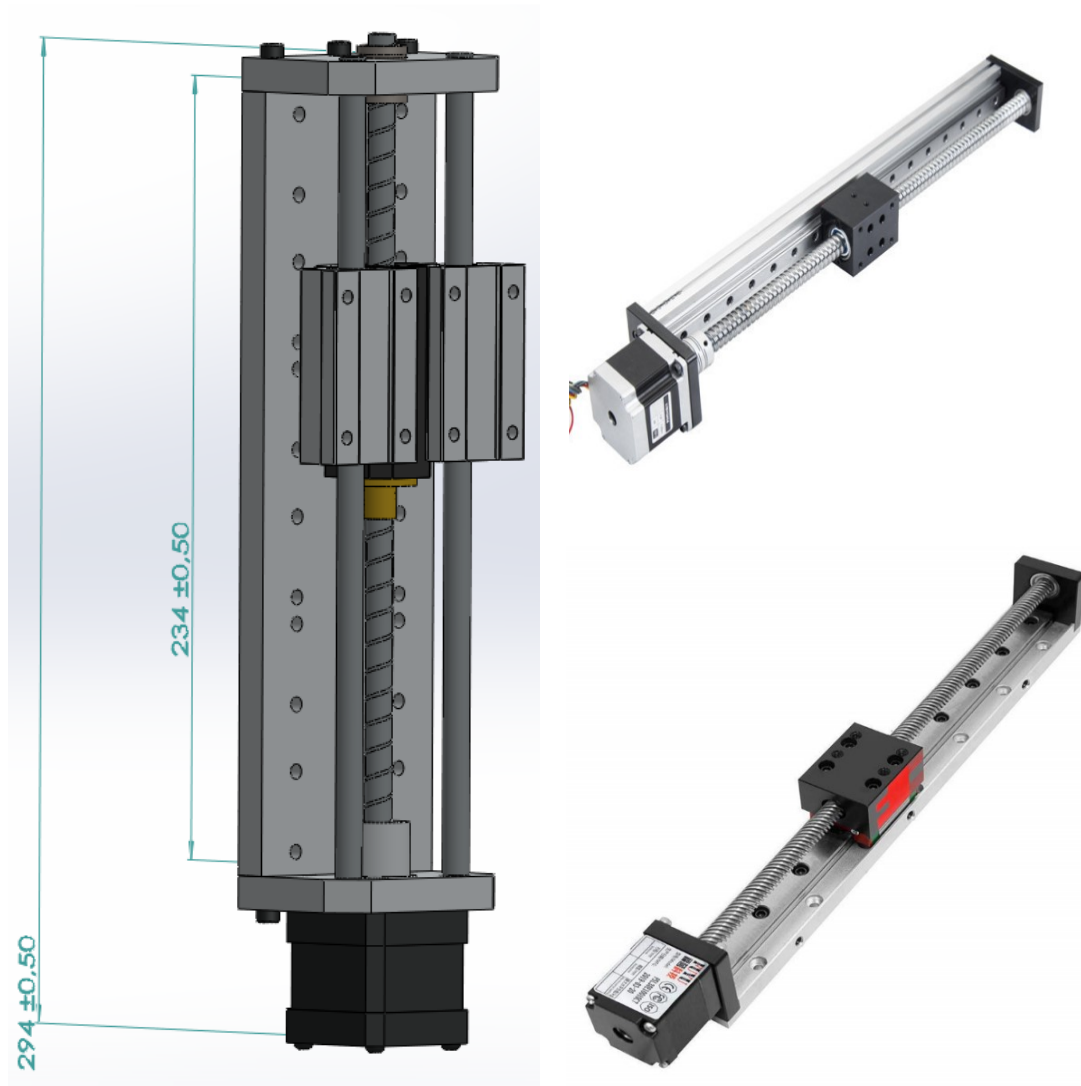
Linear Actuator Solidworks Model – Linear Actuator [5]
